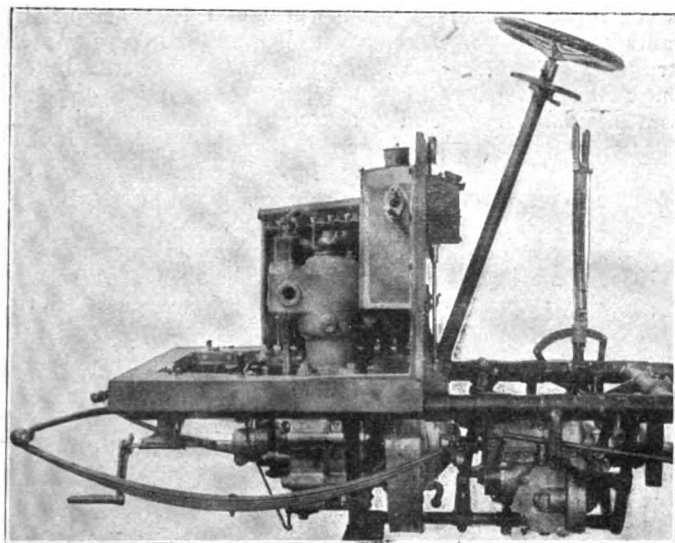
Fore Part of Chassis of 7-h.p. Renault Car.
